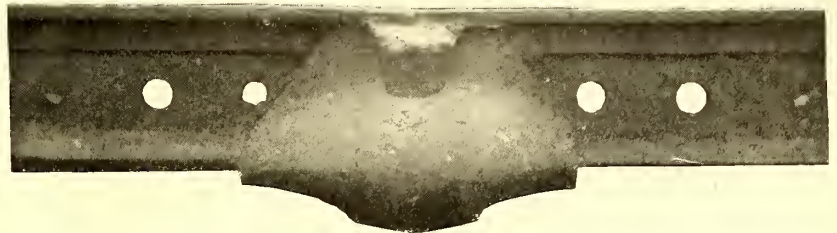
SHAPE OF CAST-WELDED JOINT USED ON CALUMET ROAD
